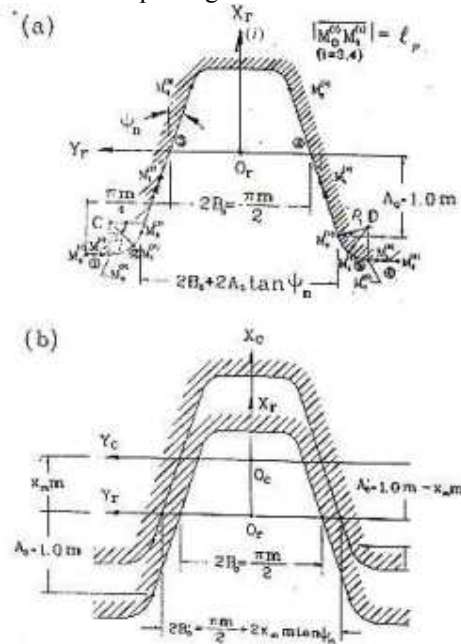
Normal Section of the Rack Cutter Σ_p for Generating the Driving Elliptical Gear (a) Standard Cutter (b) Shifted Cutter.
